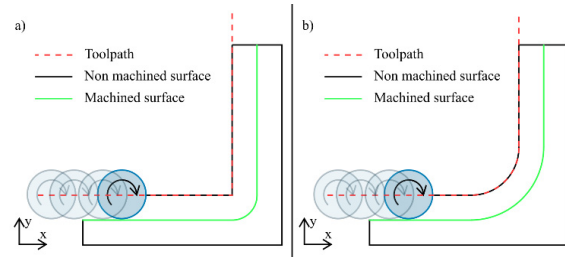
Machining a 90° a) unsmooth corner b) smooth corner
